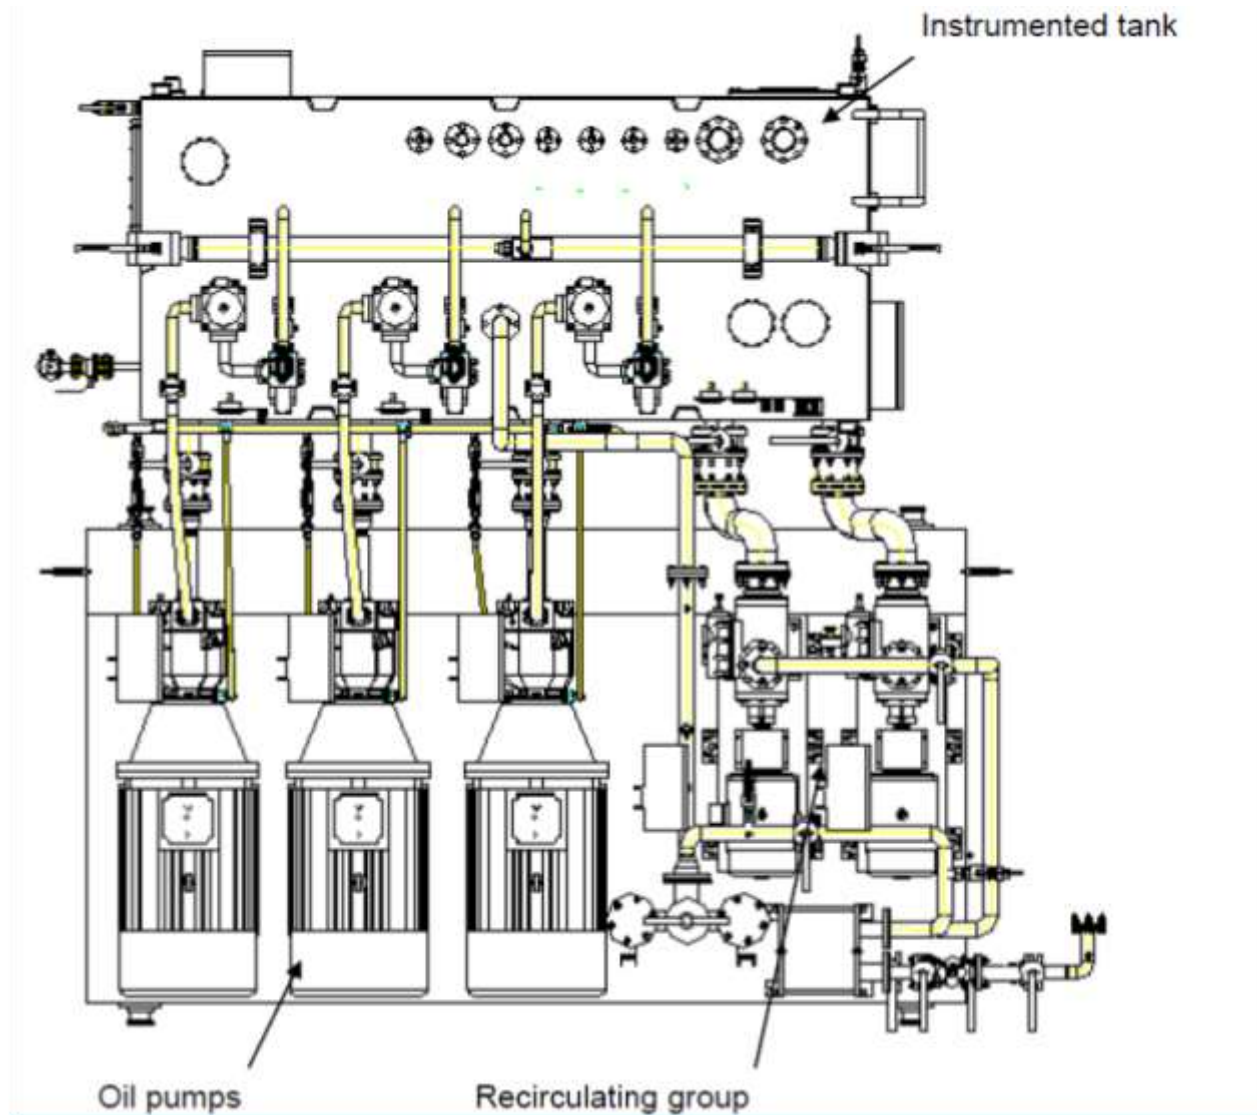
Typical Hydraulic Pump Arrangement
